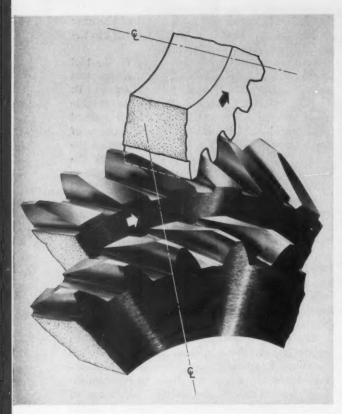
A trace is formed on the cutter teeth by their contact with the gear. It is along this line that each cutter tooth is sharpened.
